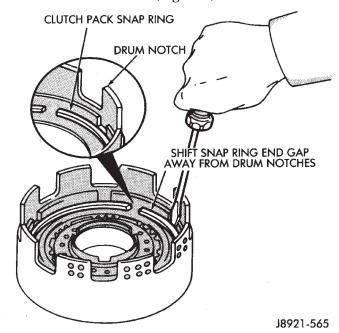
Adjusting Clutch Pack Snap Ring Position
